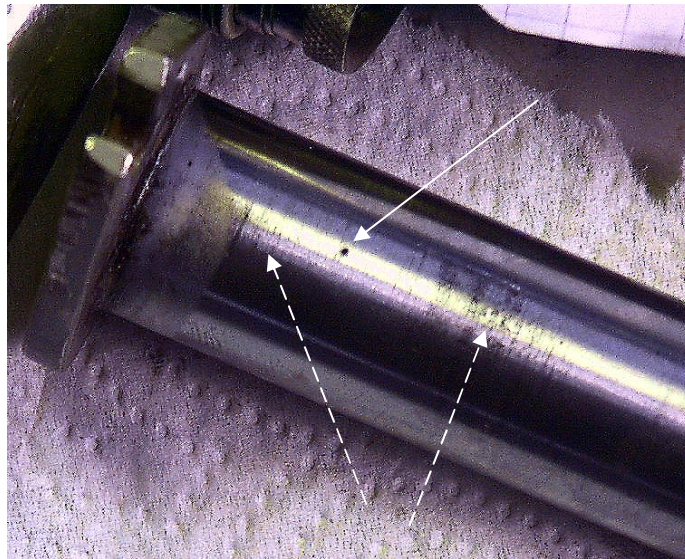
Landing Gear, right leg, fuselage fitting fixing bolt.
